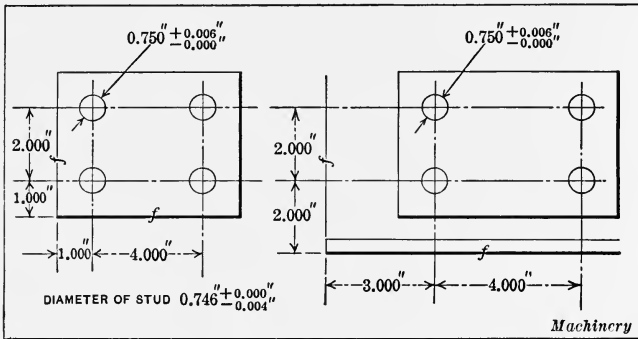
Method of dimensioning Location of Holes without Tolerances
